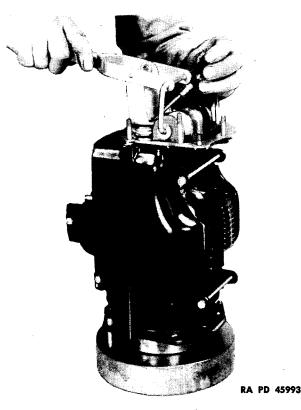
Removing Valve Keys, Using Compressor 41-C-2559
